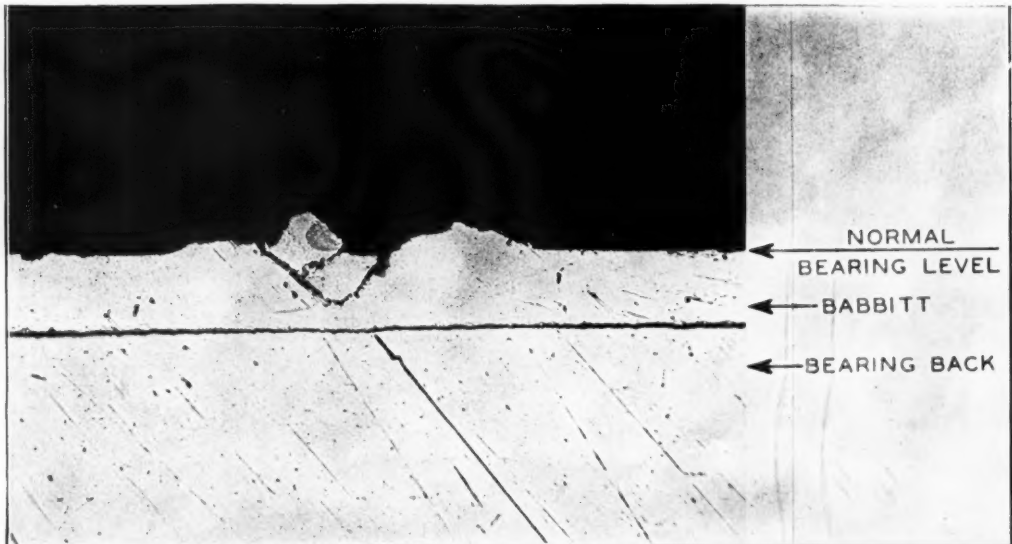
Showing an imbedded particle of dirt, magnified to illustrate disarrangement of the bearing surface.
